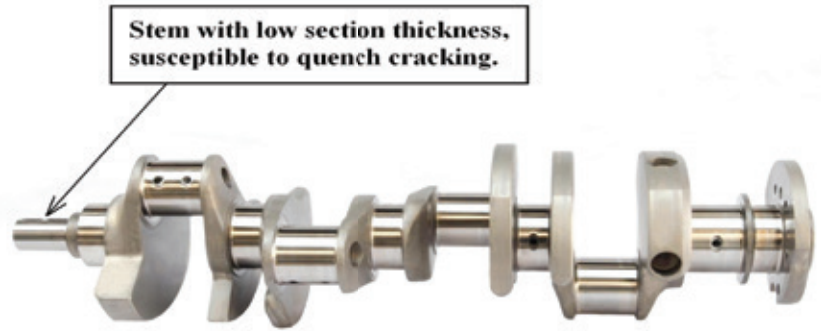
Crank shaft gear-end section prone to quench cracking
